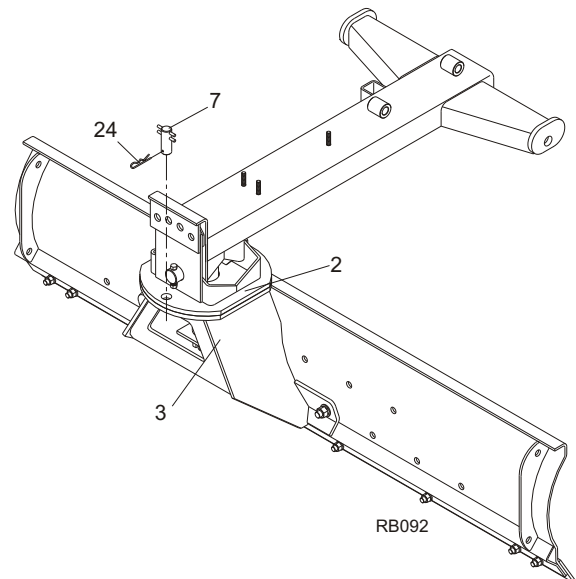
Main Frame and Turn Table Installed to Moldboard
